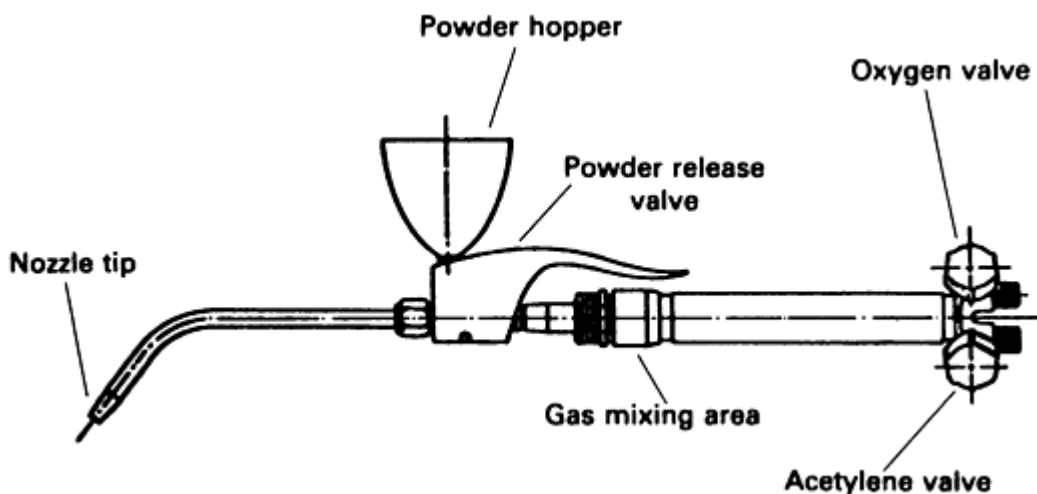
Spray-and-fuse torch in which the powders is conveyed by gravity into the flame and conveyed to the workpiece by the force of the combustion gases
